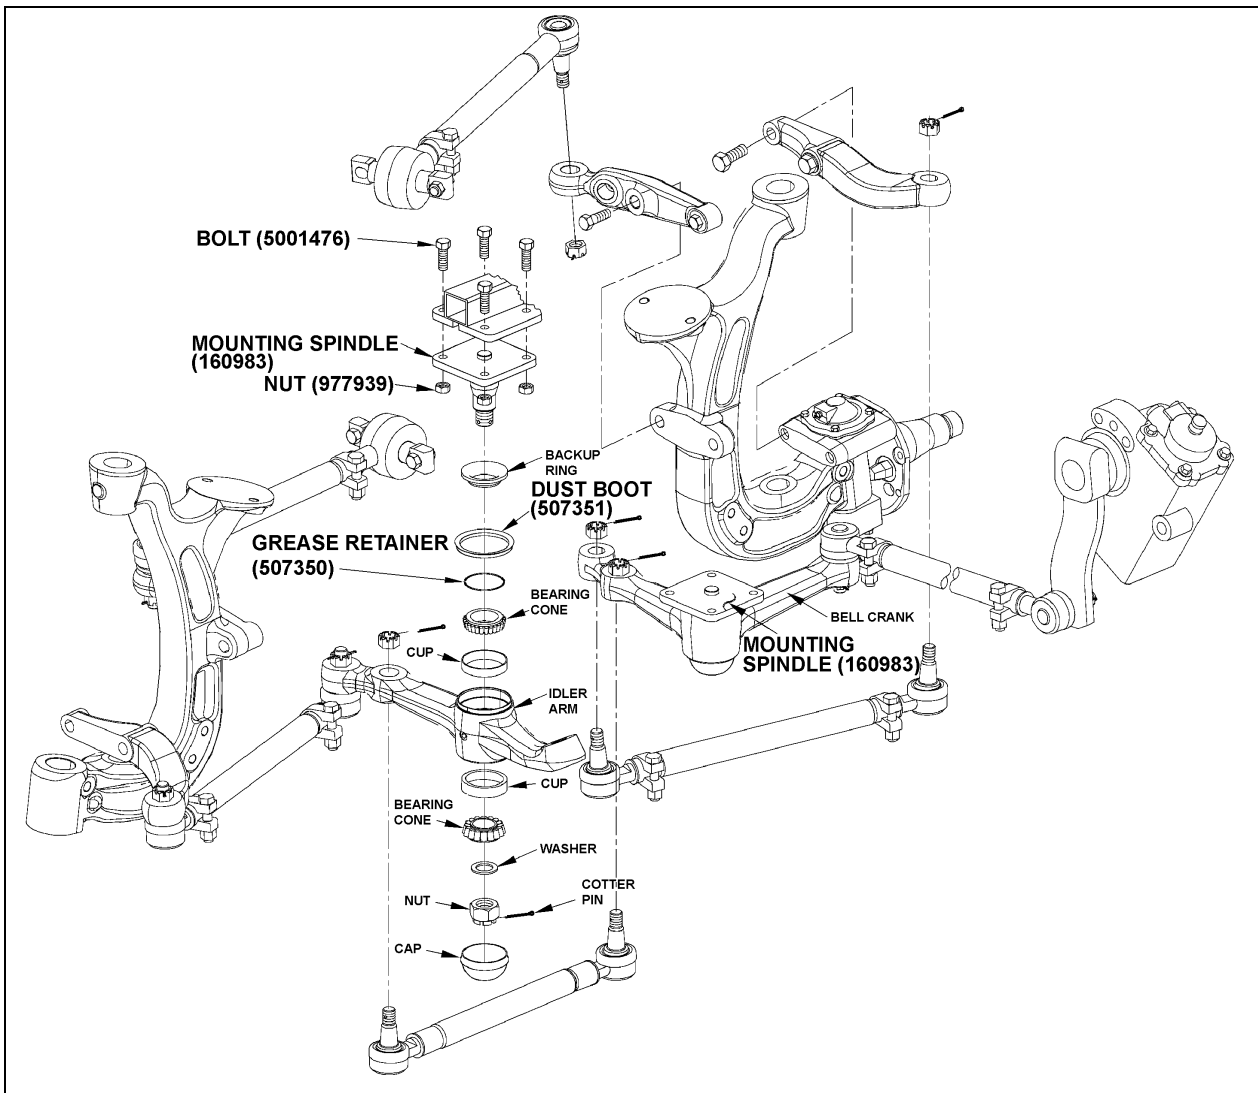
BELL CRANK AND IDLER ARM STEERING RODS ARRANGEMENT
